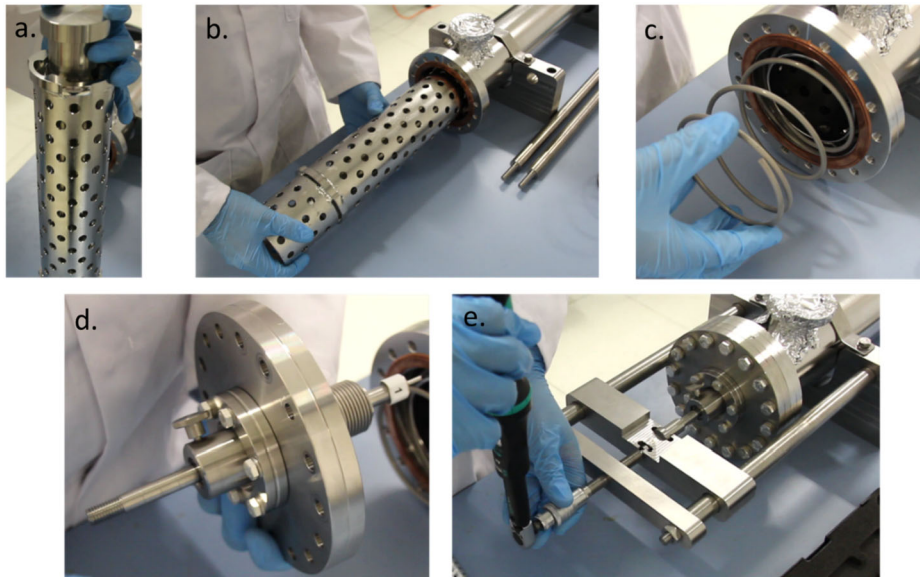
Assembly and operation of the executed piercing tool design starting with insertion of a mock-CSVC. (a) CSVC inserted into sample holder. (b) Sample holder with CSVC slide into the piercing tool. (c) preload spring is inserted into piercing tool to add tension to sample holder and cap. (d) Sample cap with piercing mechanism placed onto piercing tool and bolted into place. (e) Piercing mechanism manipulated to piercing bottom wall of the CSVC. Video of piercing tool assembly and operation shown in Supplement
